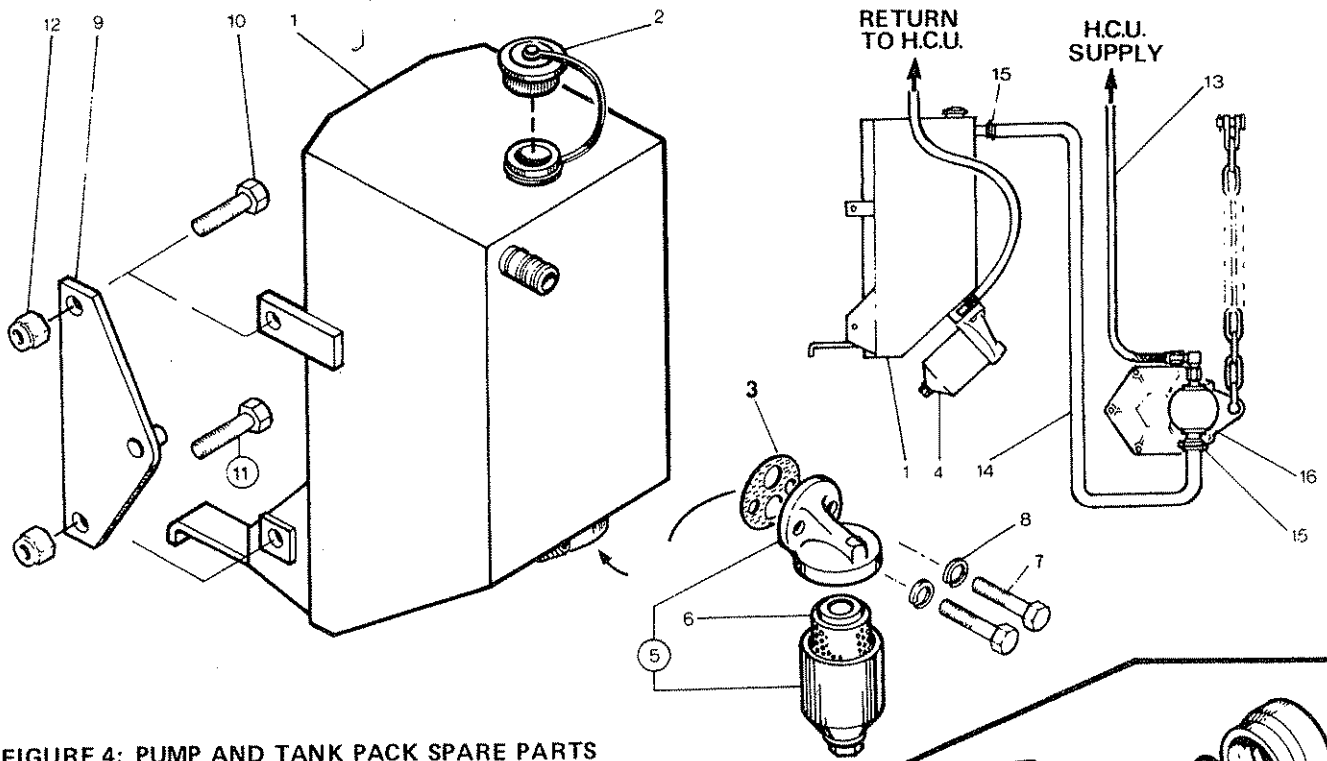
PUMP AND TANK PACK SPARE PARTS
